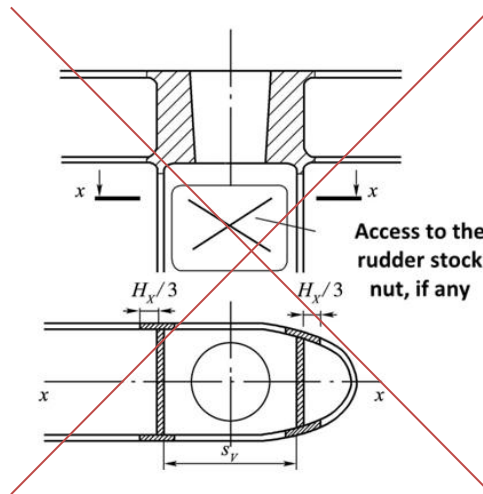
~~Cross section of the connection between rudder blade structure and rudder stock housing~~
